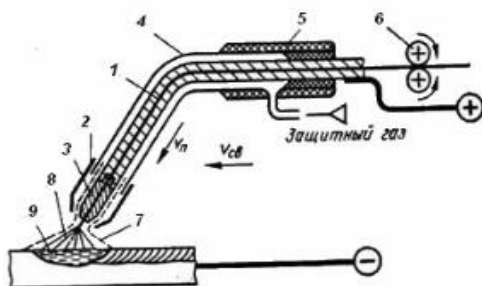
The process of making a welding seam by welding in a protective gas environment; 1 - welding wire, 2 - gas nozzle, 3 - conductive mouthpiece, 4 - burner body, 5 - burner handle, 6 - wire feed mechanism, 7 - protective gas atmosphere, 8 - welding arc, 9 - welding bath.
